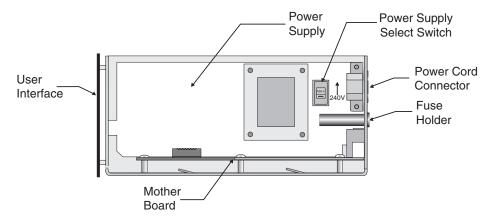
Side View of CPU, PS, User Interface Assembly
